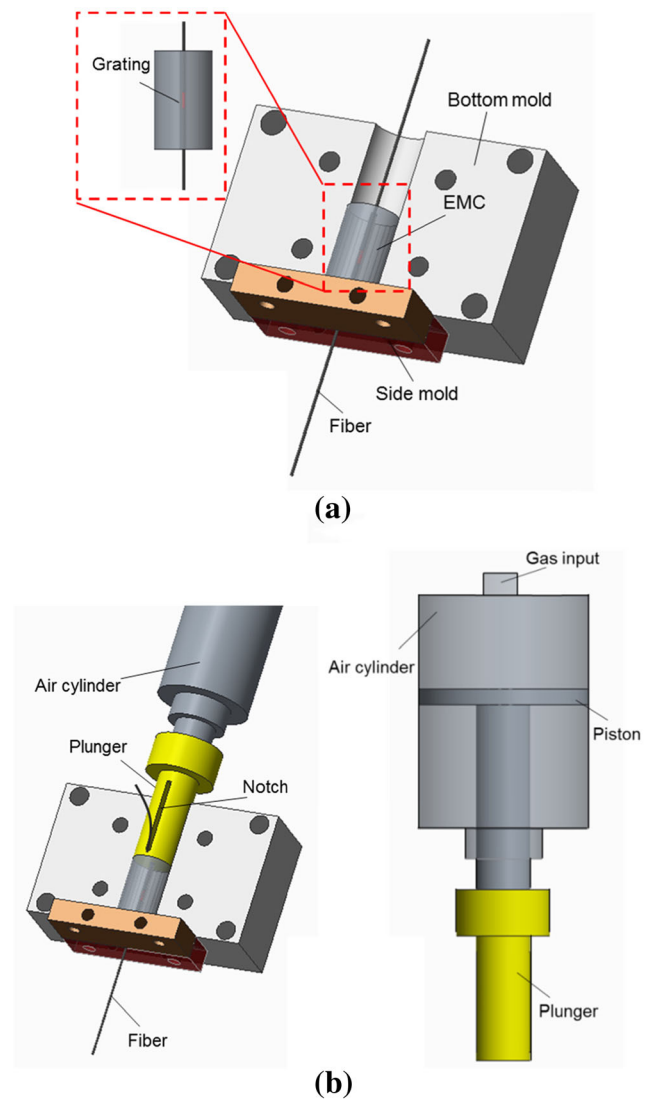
Mold assembly to fabricate the specimen: a mold and pellet and b plunger and air cylinder
